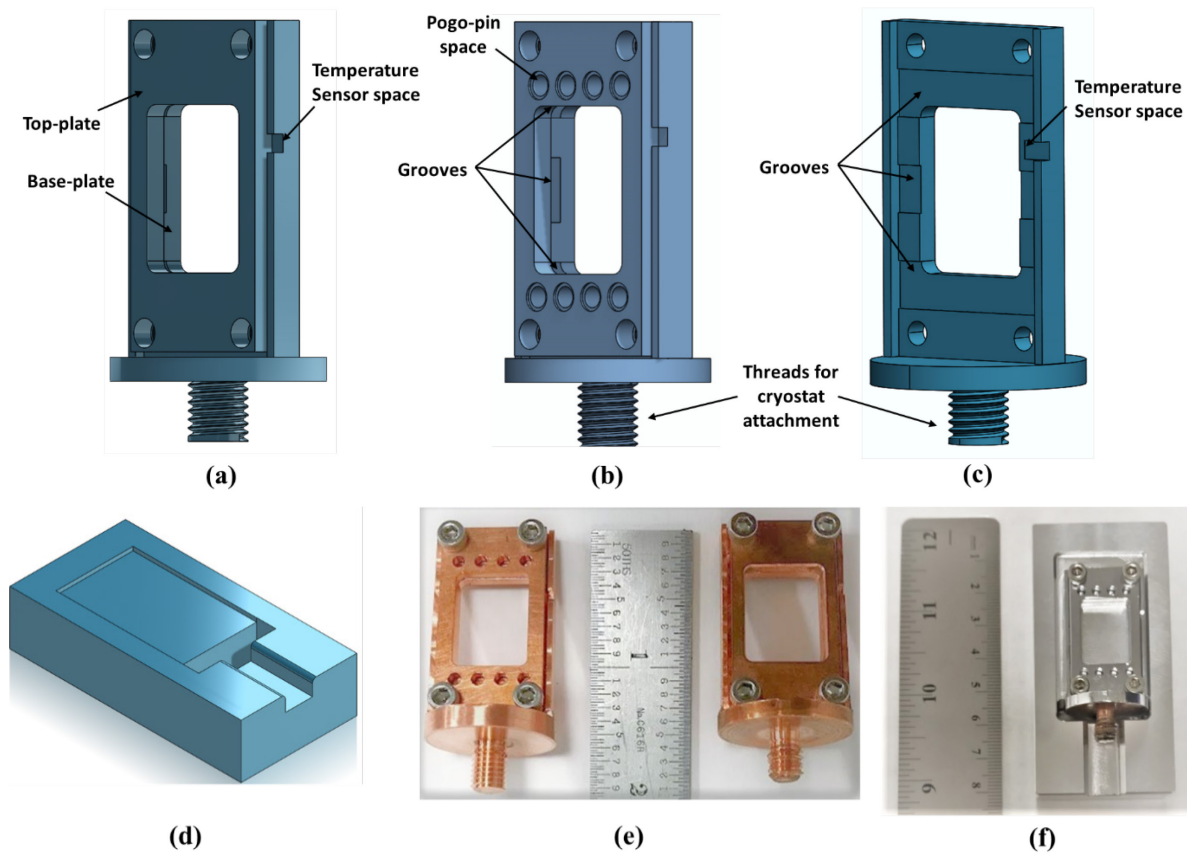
Solidworks drawing of a) Plain sample holder with base plate and top plate together, b) Pogo-pin sample holder with base and top plate, c) Only base plate of the sample holder, d) sample installer, Actual e) Plain and pogo-pin sample holder before chrome plating, e) pogo-pin sample holder sitting on the sample installer after chrome plating.
